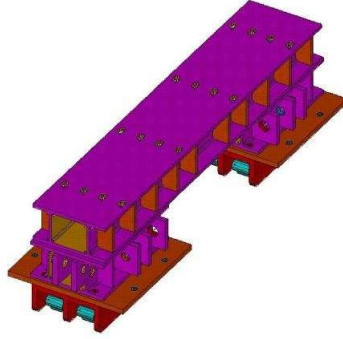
Hilman Roller assembly used to roll both of the BTeV Toroid pair assemblies and also the Vertex Magnet from the C0 Assembly Area to the C0 Assembly Hall
